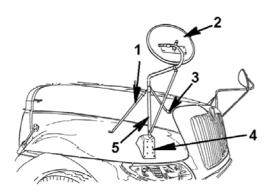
Fender-Mounted Mirror (Passenger Side Shown)
